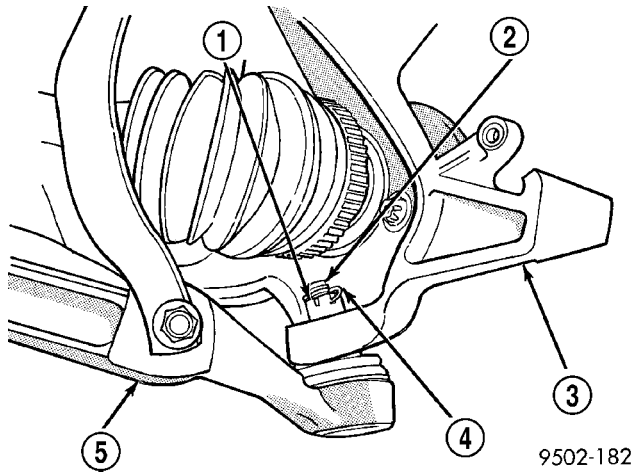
Lower Ball Joint to Steering Knuckle Attachment
